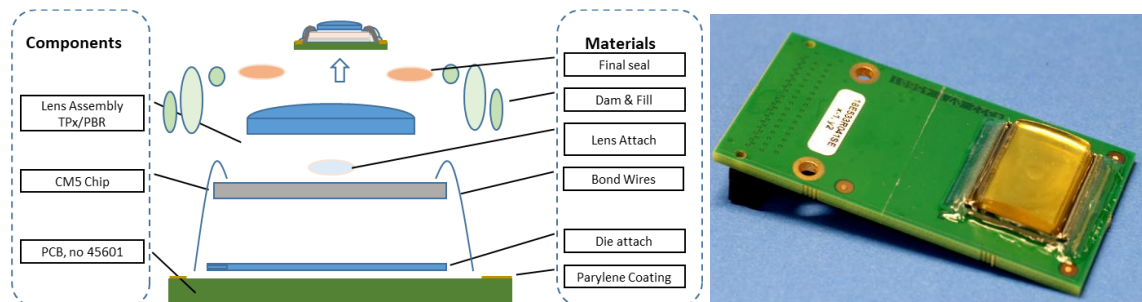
Left, version B: schematic assembly flow of the acoustic stack. Right: CMUT CM5 device assembled on PCB
